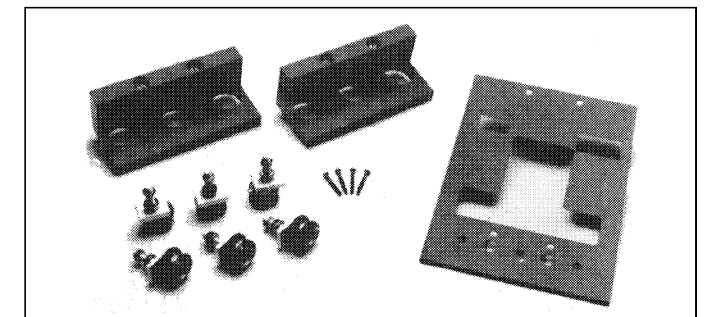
Eaton Adapter Kit Parts Before Installation
